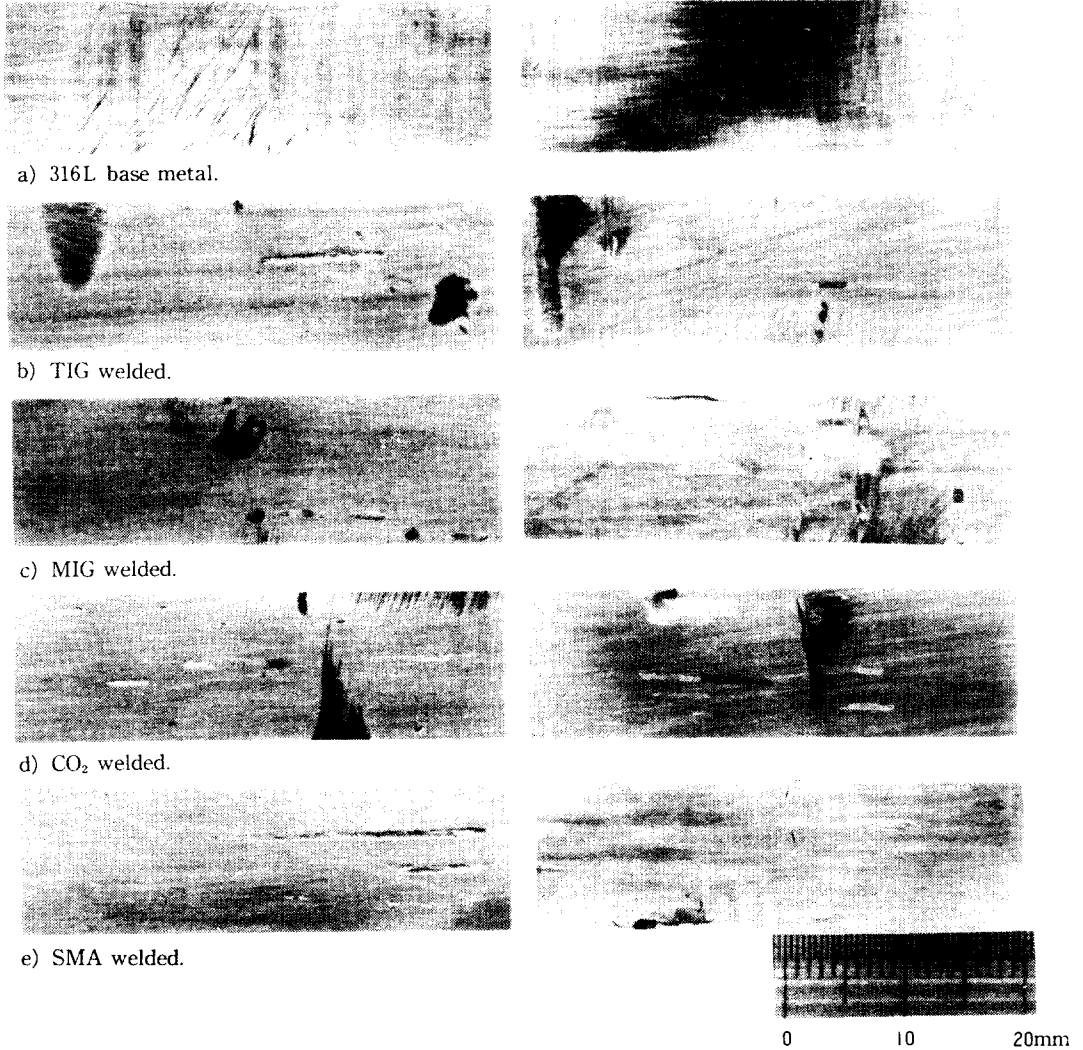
Crevice corrosion for 316L and welded sections exposed in 10% FeCl₃ solution at 35°C, 120 hrs.
